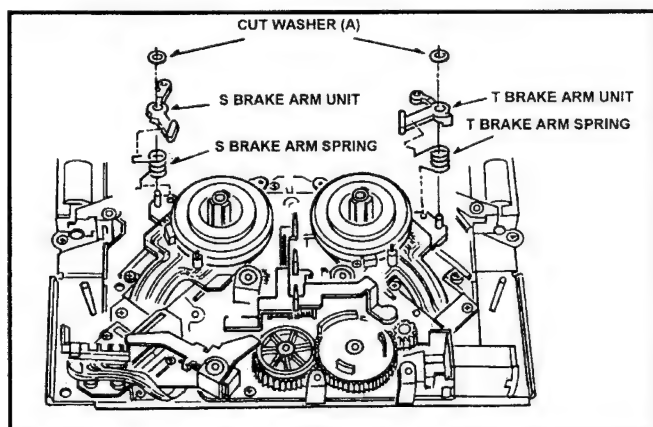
Removal of S & T Brake Arm Unit
